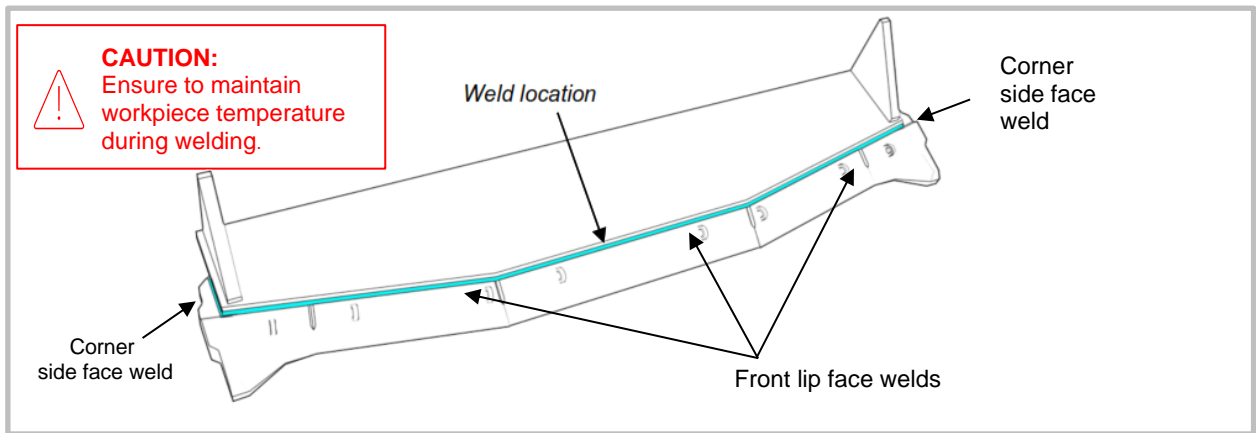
Bevel weld – top side of the lip (image is for reference purposes only).
